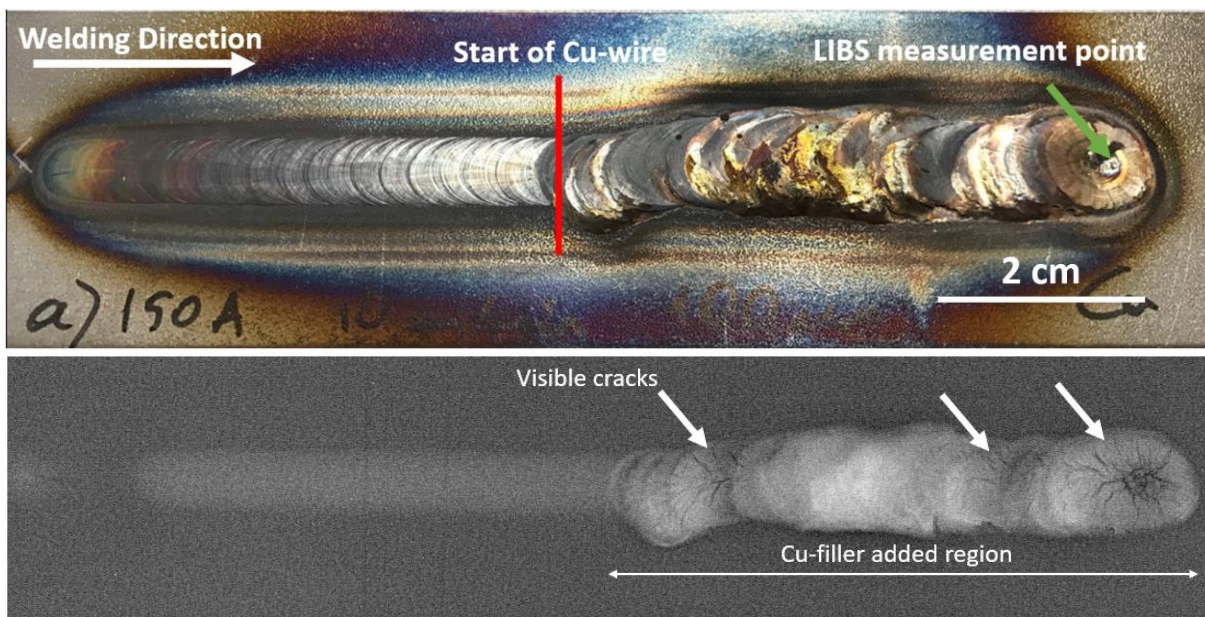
Top view of the completed weld bead (b) with Cu wire addition at 50mm. The radiograph of the completed weld is shown below the weld picture.
